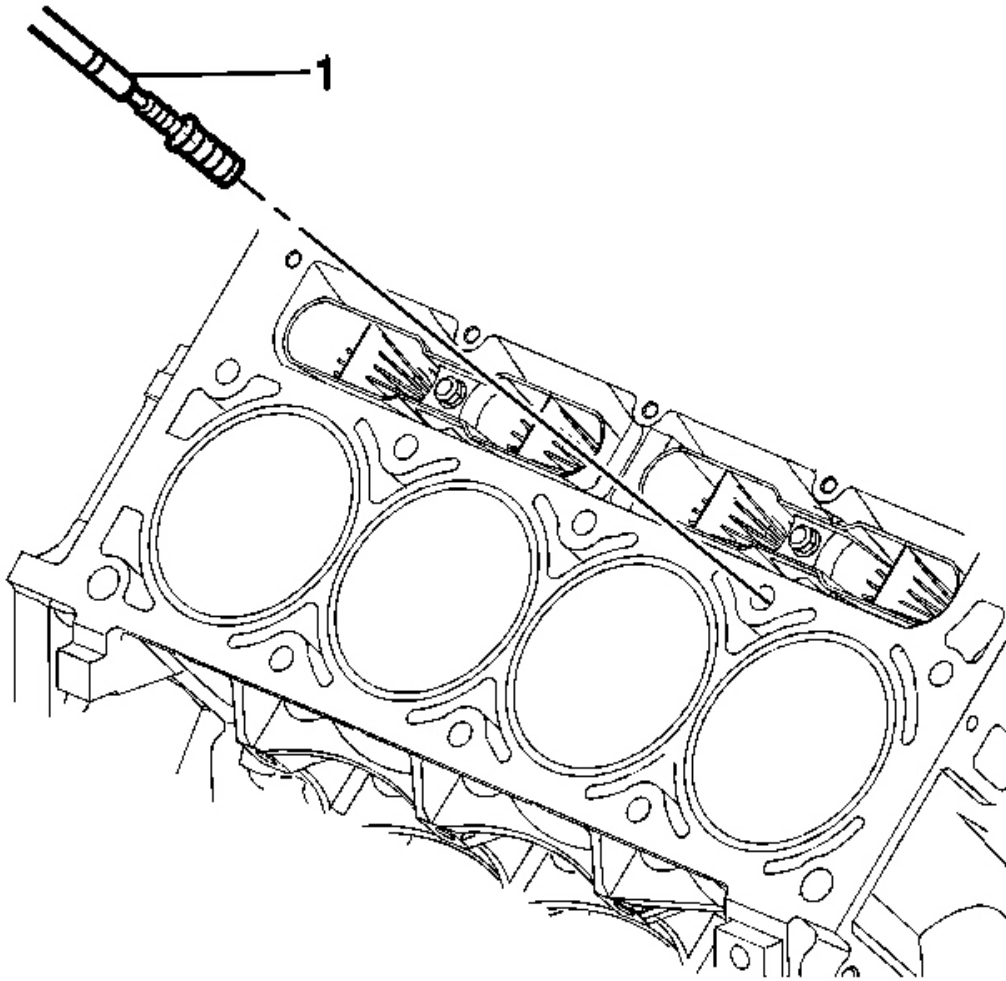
Installing Insert & Driver Into Cylinder Bolt Hole
